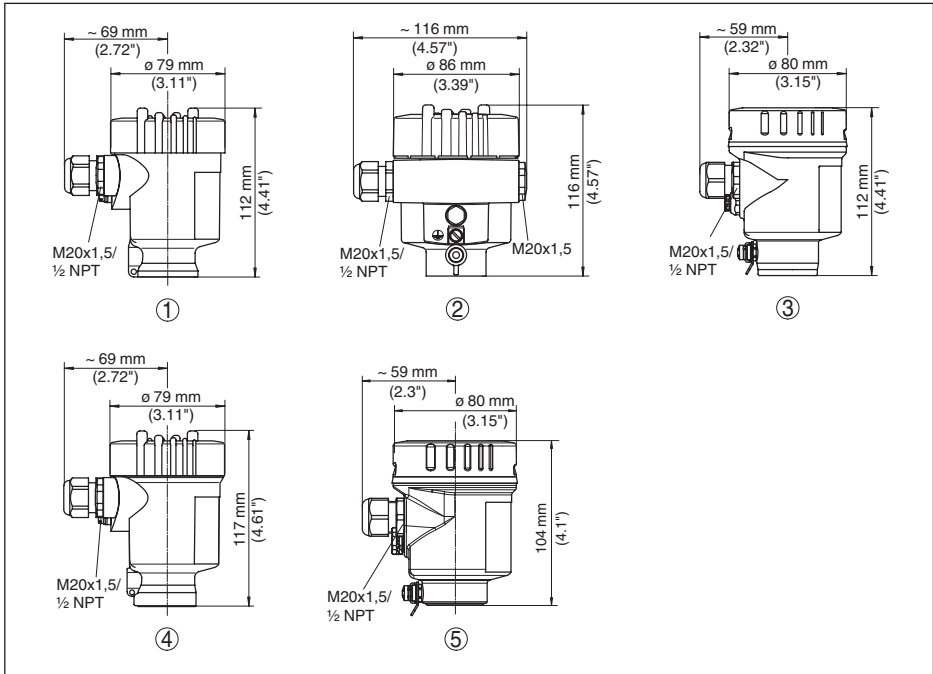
Housing versions in protection IP 66/IP 67 and IP 66/IP 68 (0.2 bar)
